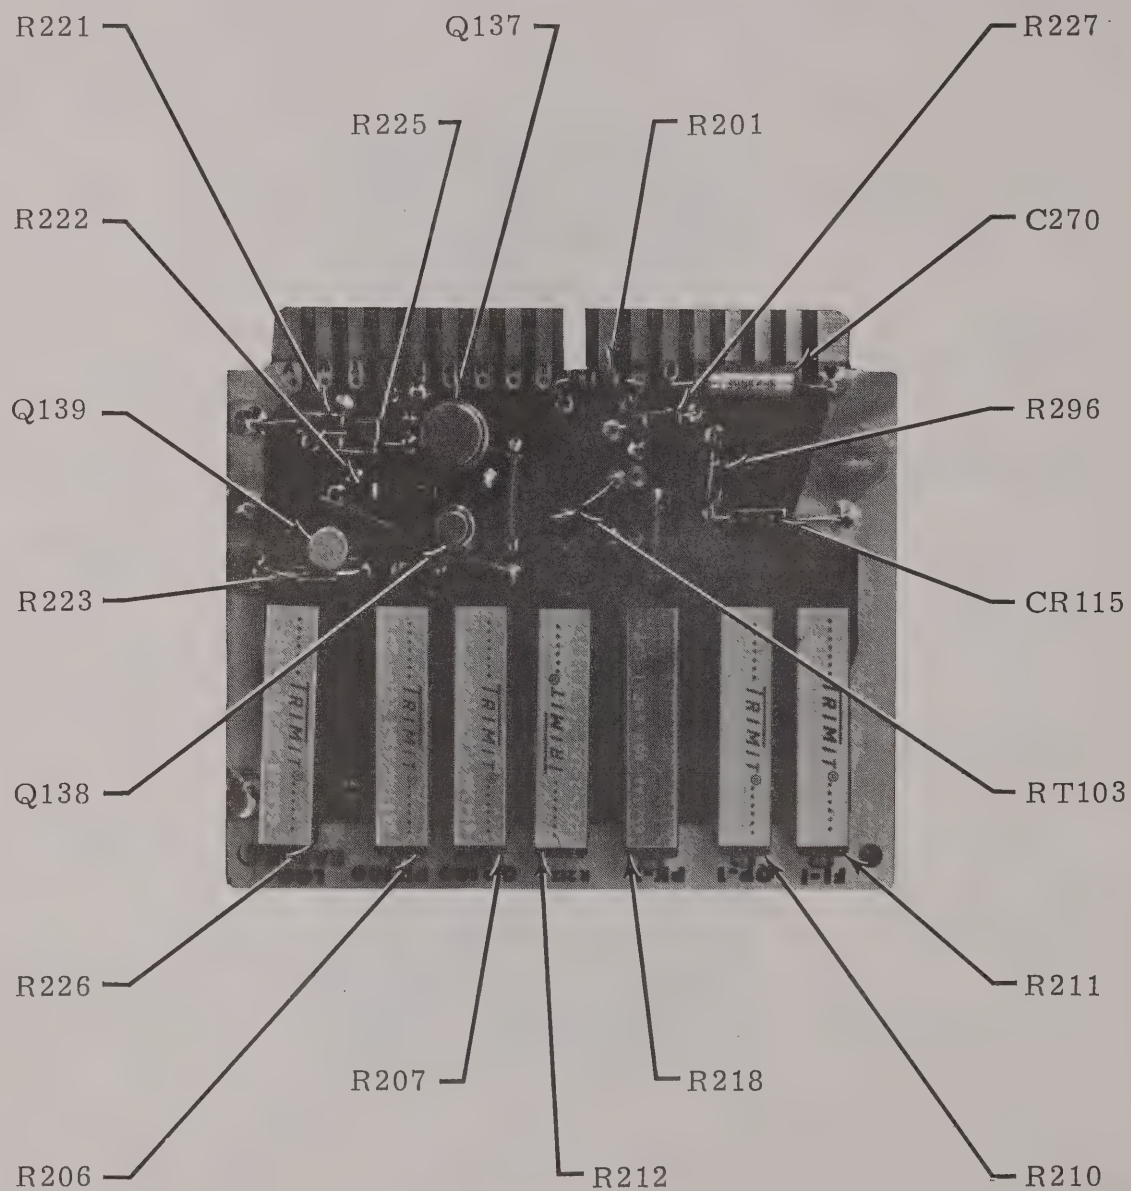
Component Location - Metering and Weighting Board, Z117
